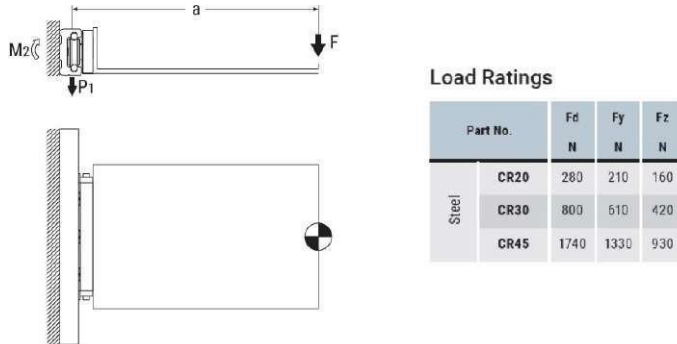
Load on the carriage due to the sanitizer bottle and Load ratings of the carriage
